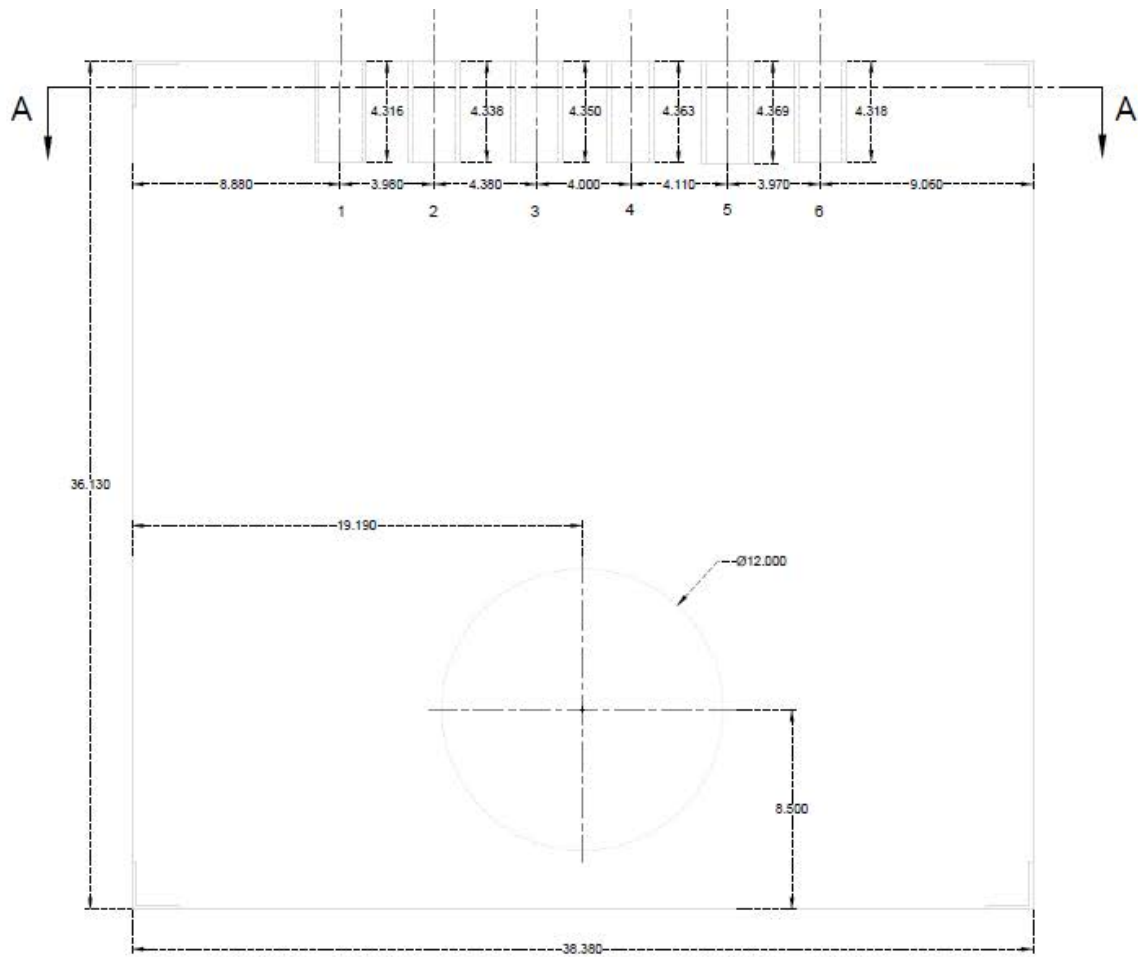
As-built dimensions of inlet plenum (front view; in inches).
